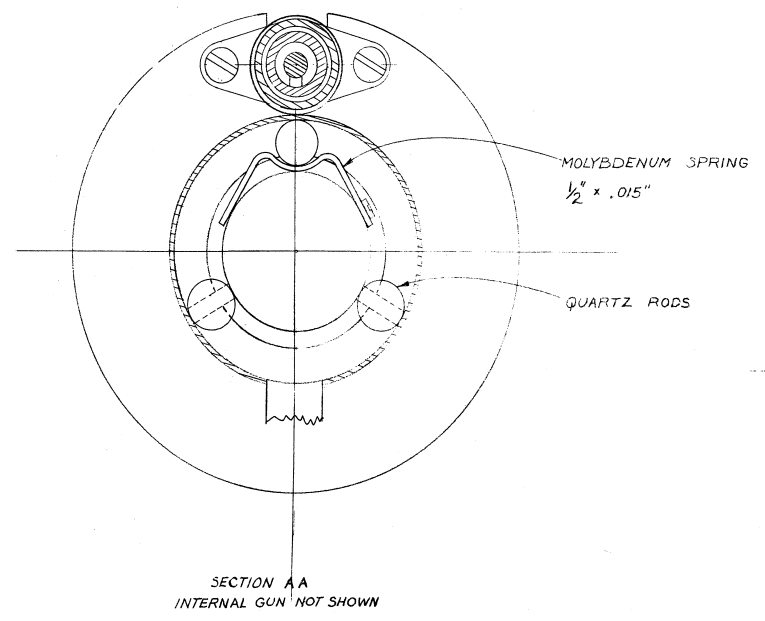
ASSEMBLY DRAWING OF TUBE S-185.
